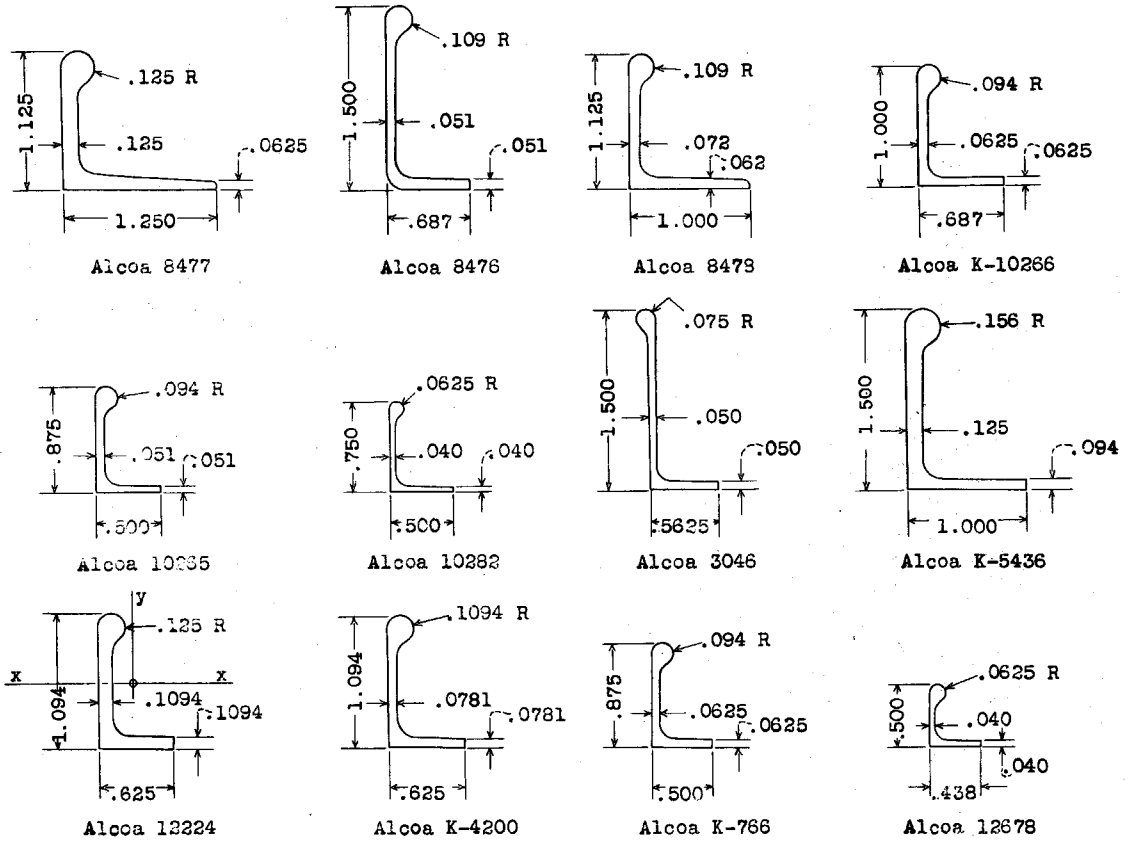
Bulb-angle test specimens. All dimensions in inches.
